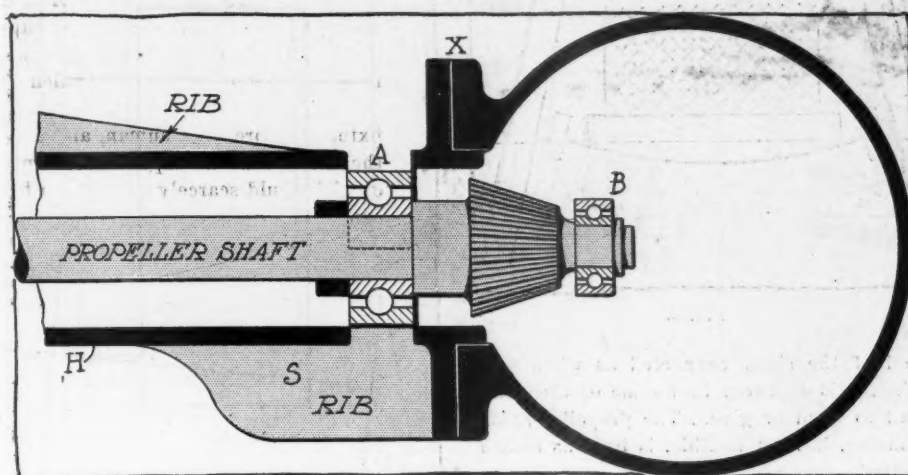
DESIGN OF PROPELLER SHAFT HOUSING
